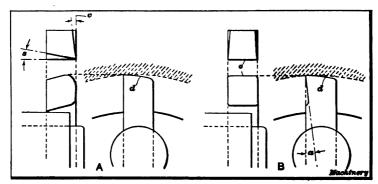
Boring Tools for Roughing and Finishing Cuts
